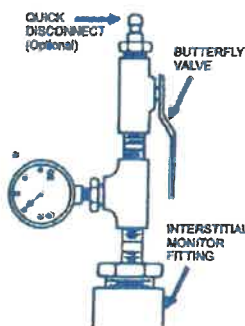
VACUUM GAUGE TEST ASSEMBLY (TYPICAL).
